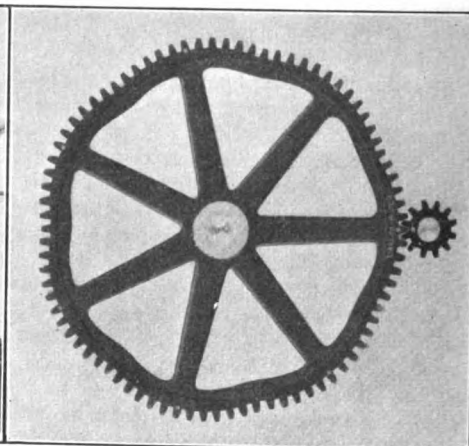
LOBULAR GEAR AND ELLIPTICAL PINION OF EQUALIZING MECHANISM
